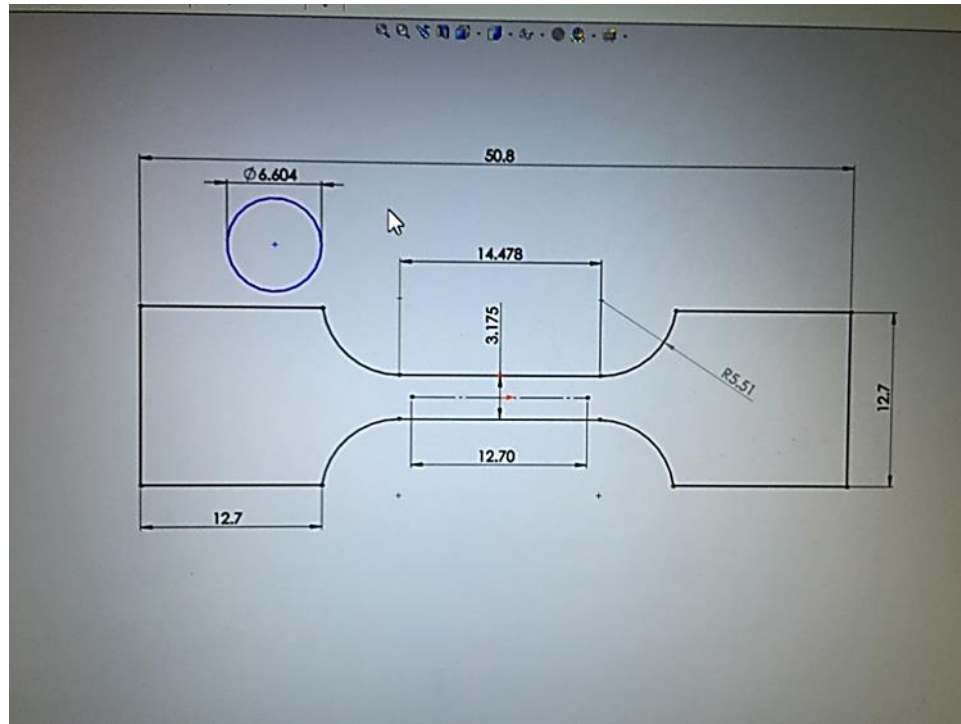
shows the dimensions from the STL file used to produce the 3D printed samples (all measurements in millimeters). 3D printed samples were produced using an LPBF method and uploading the appropriate dimensions of the STL file to the printer. Dimensions are scaled down from ASTM E-8 standards for dog bone shaped samples used in tensile testing [43]. The samples were reduced in size to produce a larger quantity of samples, to save on material costs, and to allow for the collection of statistically significant data. The traditionally manufactured samples were cut to the same dimensions from a sheet of metal with the same composition as the powder used for the 3D printed samples.
